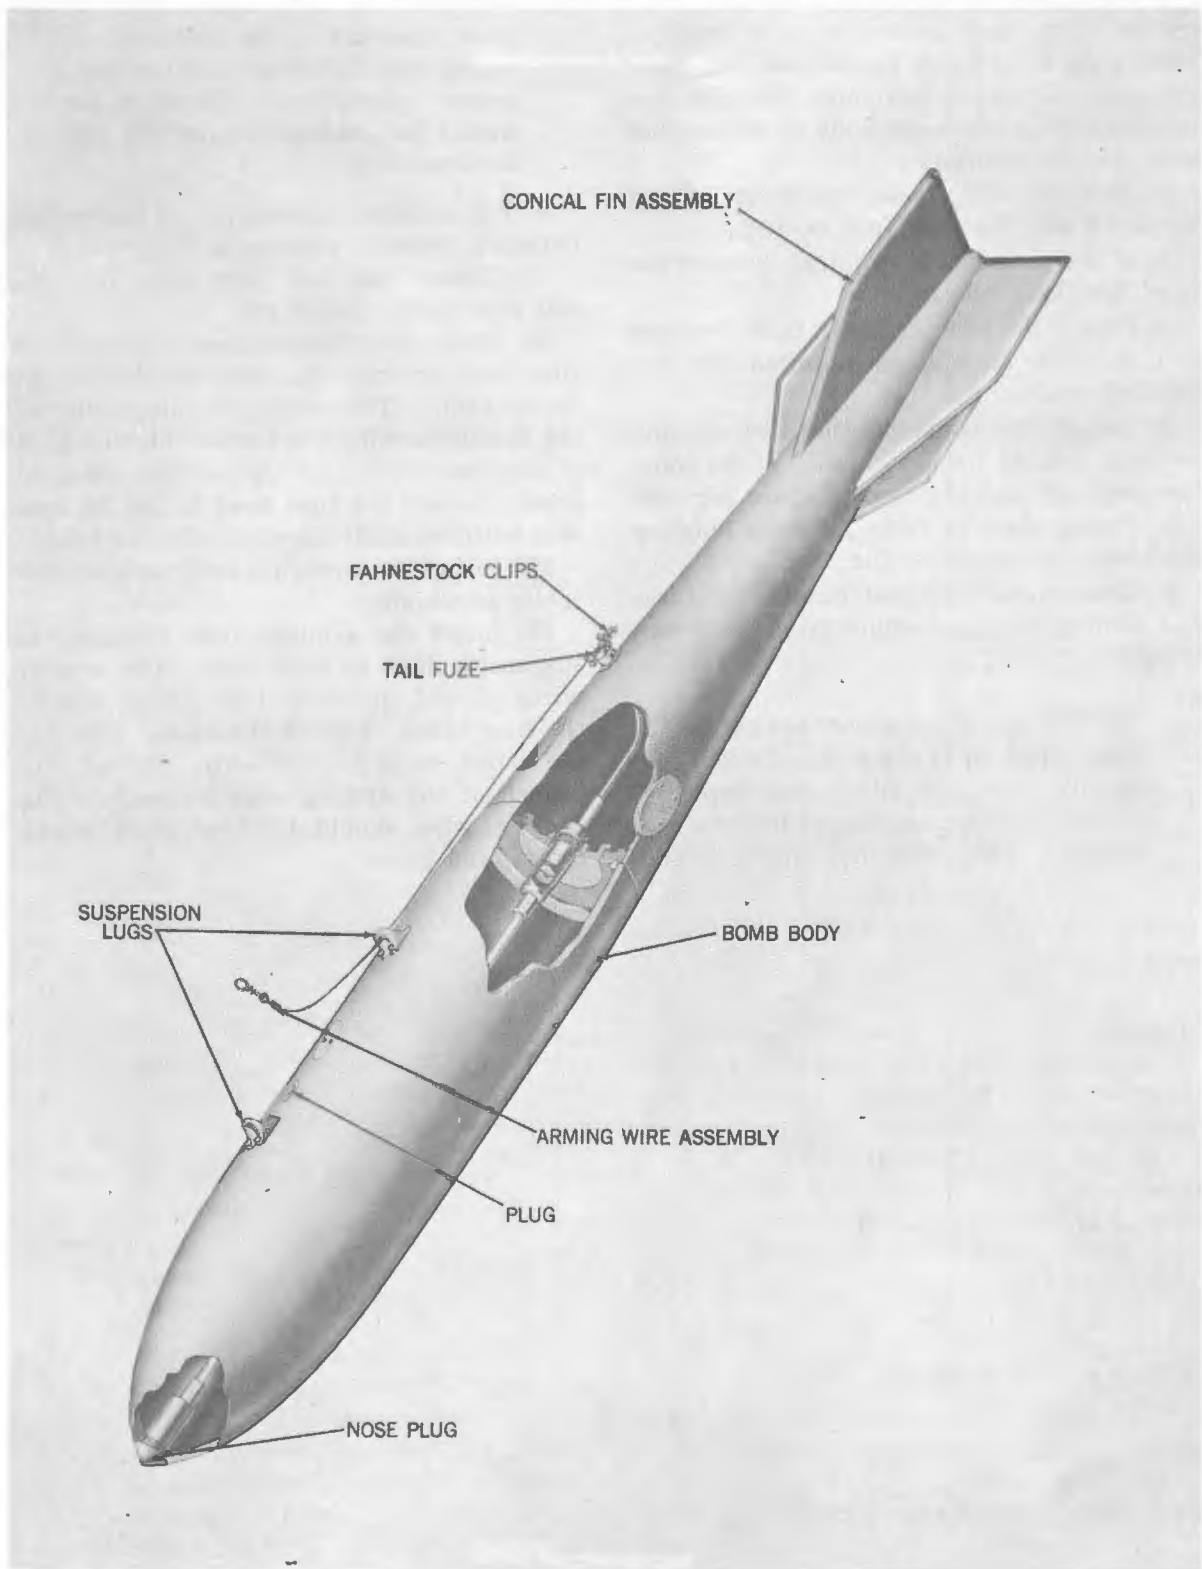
3000-lb Demolition Bomb M118 (Mechanically Fuzed), Cutaway View.
